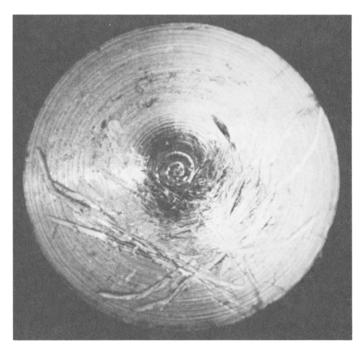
Yale pin tumbler from a lock cylinder that had been picked with a hook pick. Pin diameter is 2.92 mm (0.115 in.).
